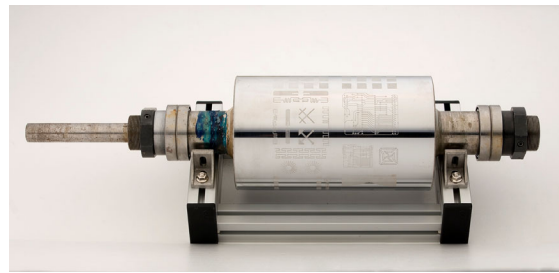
Plate cylinder for gravure printing; live shaft roller
